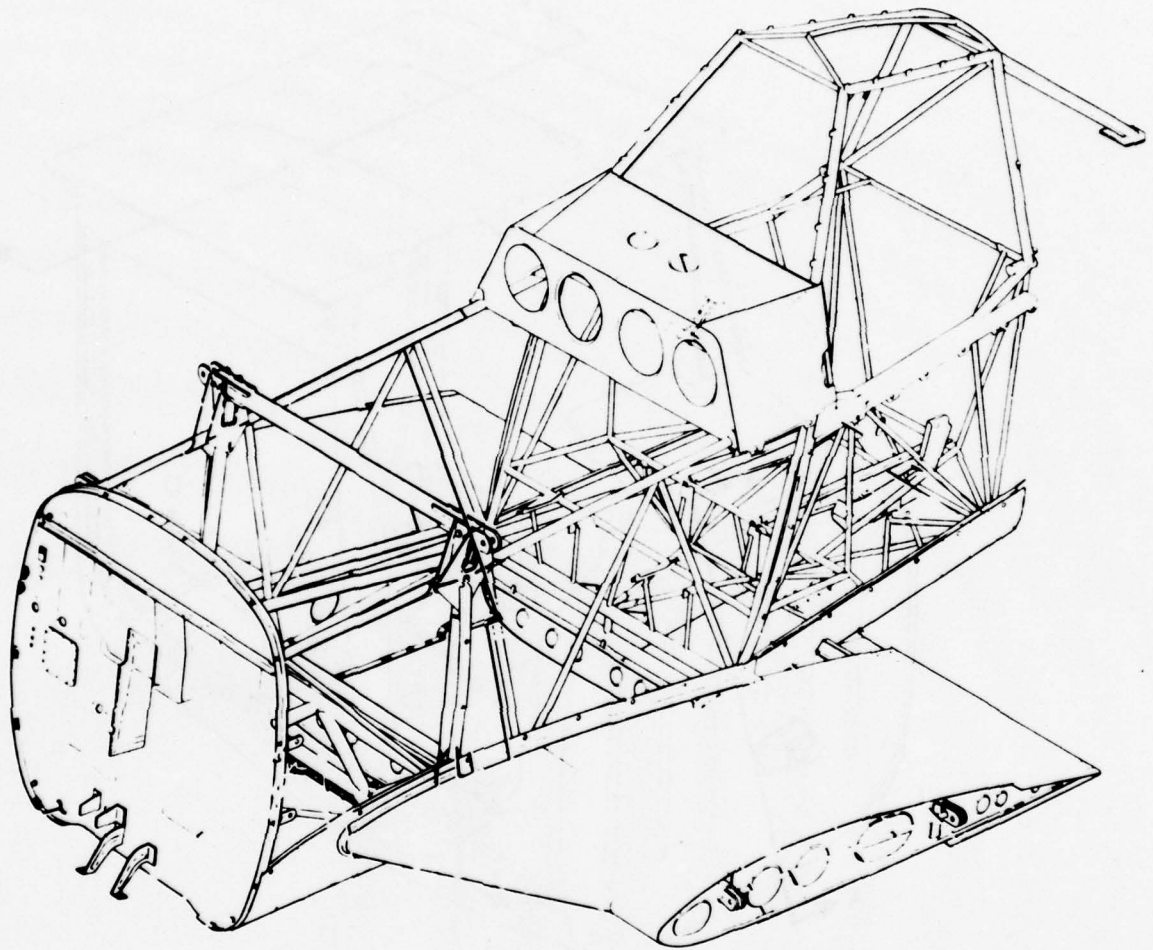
Welded Tubular Fuselage Structure
